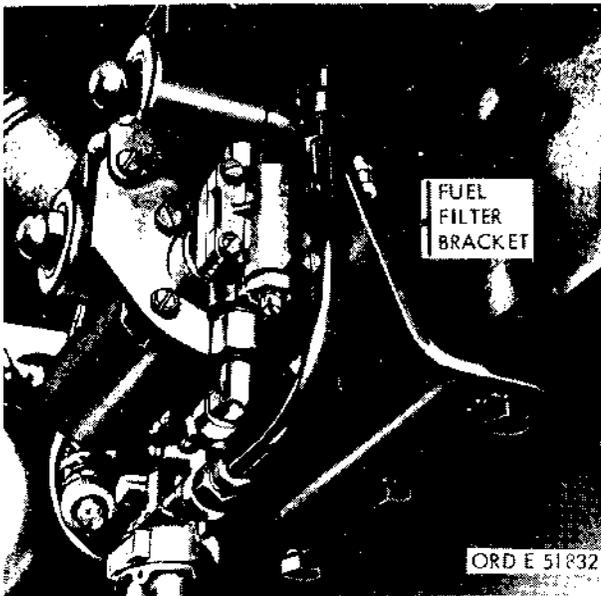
Removing manifold heater fuel filter—multifuel models.
